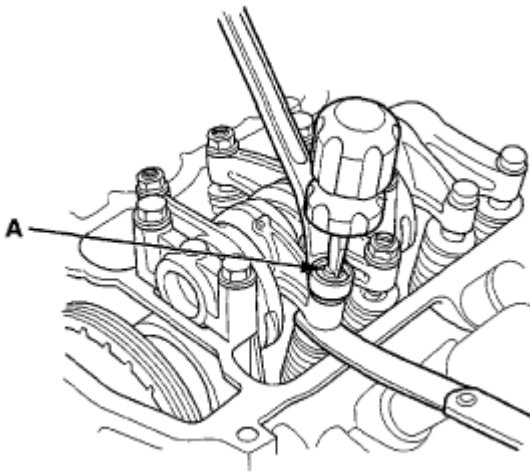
Turning Adjusting Screw Until Drag On Feeler Gauge
